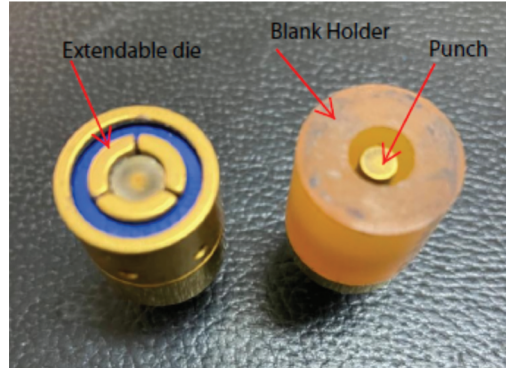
shows the clinching tools, extendable die (consisted of three sliding sectors), punch and blank holder. The used clinching machine and the set of the extensible die
